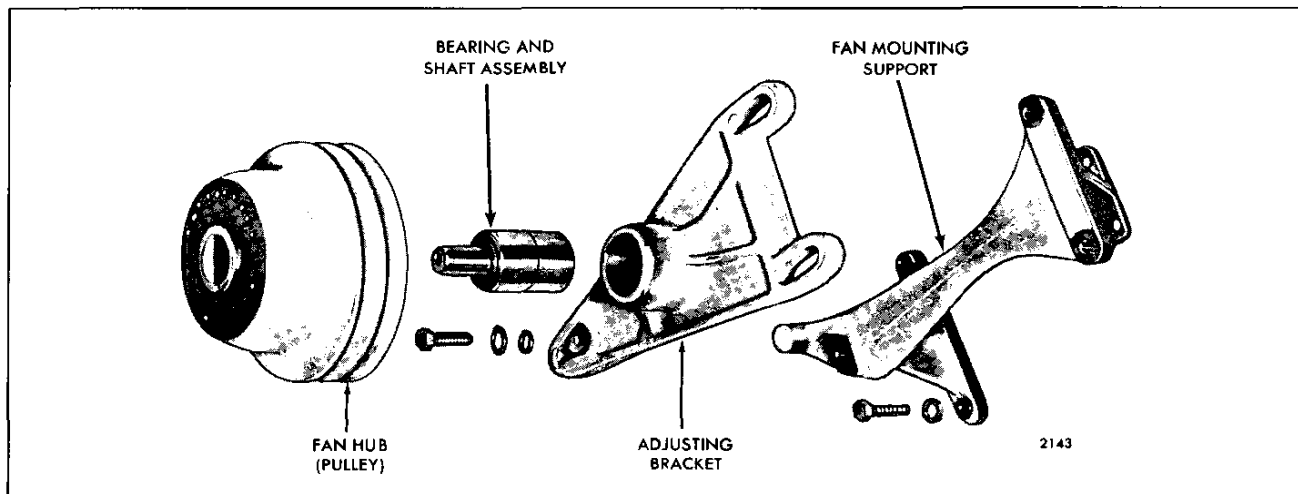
Typical Fan Hub and Adjusting Bracket Details and Relative Location of Parts (In-Line Engine)
